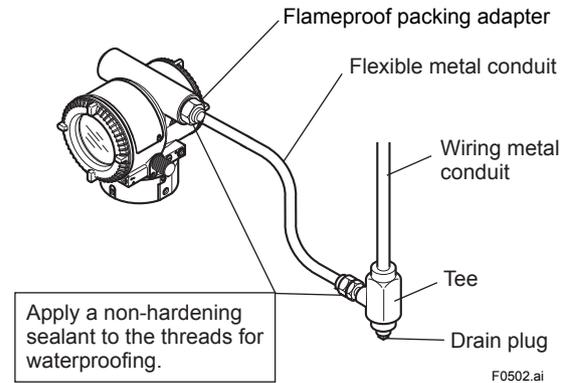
Typical Wiring Using Flexible Metal Conduit
